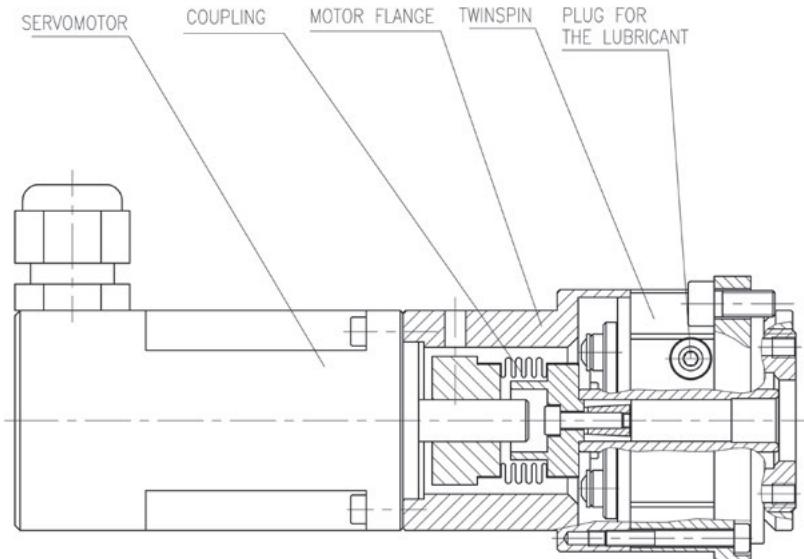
Typical connection of a motor to the M series reduction gear
